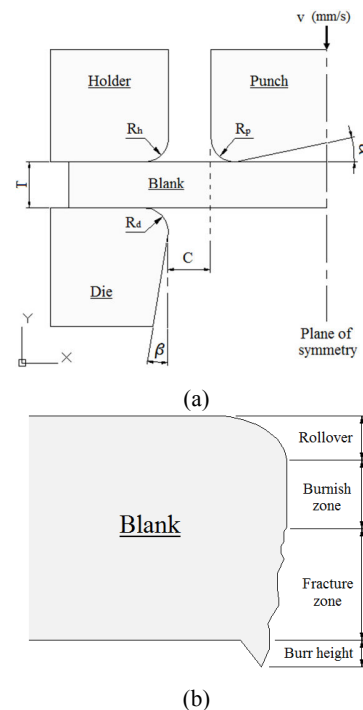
Blanking process: (a) tooling parameters and (b) sheared edge
